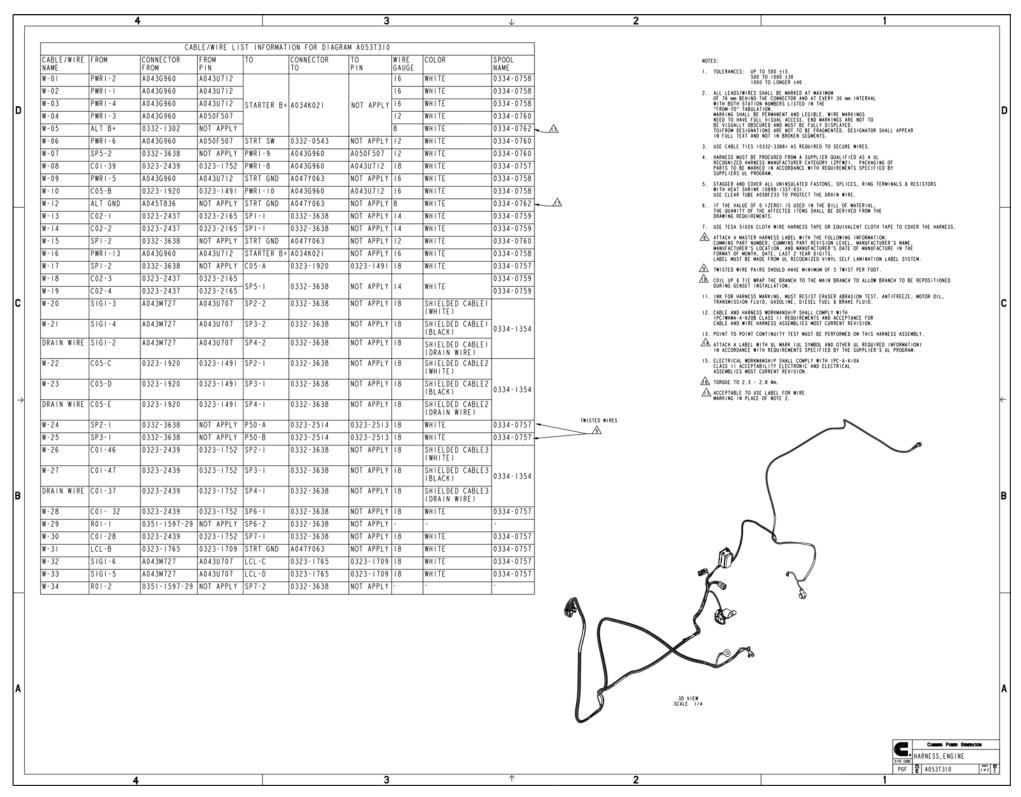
HARNESS, ENGINE (SHEET 1 OF 2)
